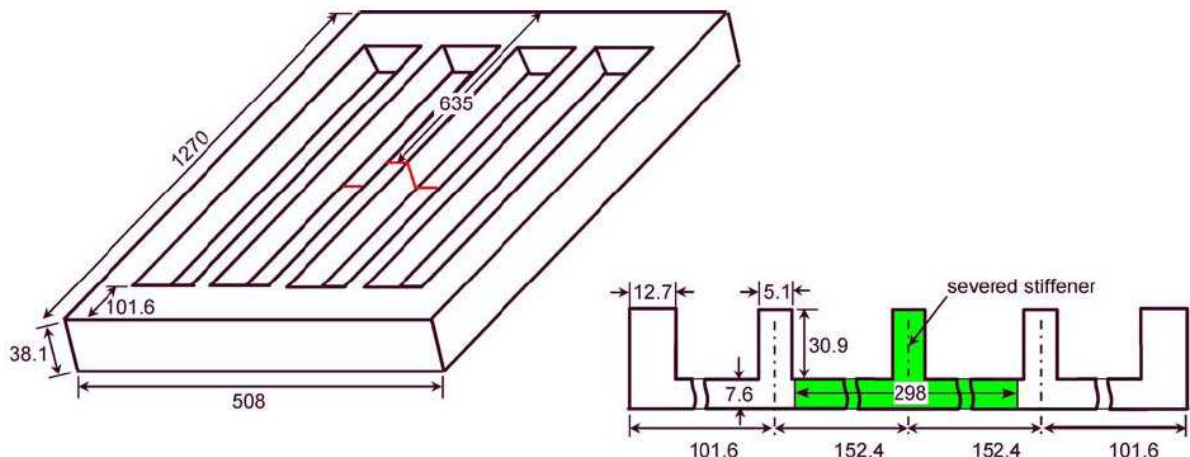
Five-stringer panel with crack dividing the central stringer; all dimensions in mm.
